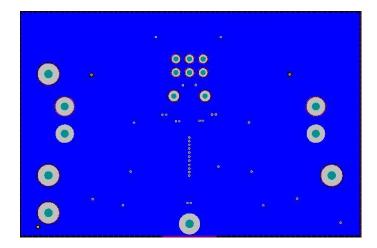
PCB Copper Layout & Silk Screen - Bottom
